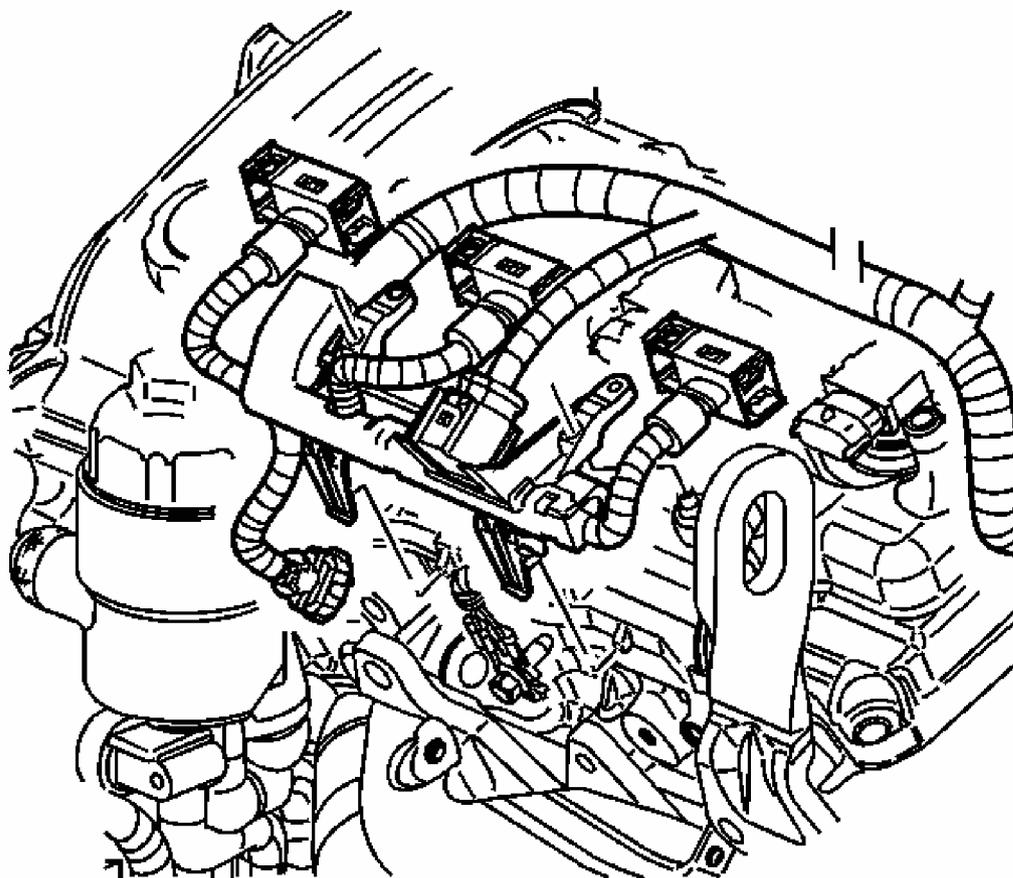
View Of Left Camshaft Cover Wiring Harness Connectors
